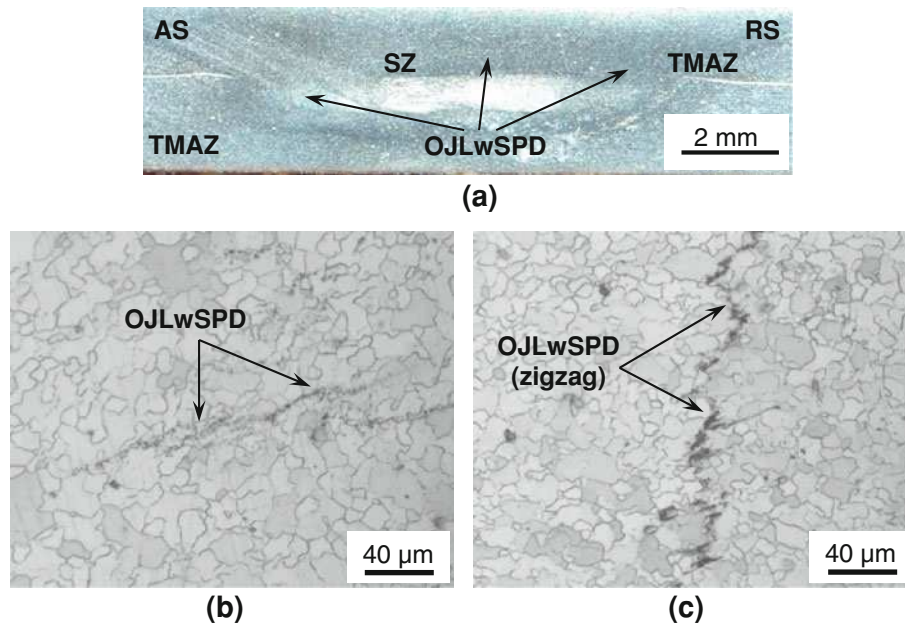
(a) Low-magnification OJLwSPD defects present in between the top and bottom sheets of a weld joined at a welding speed of 20 mm/s and rotational rate of 1000 rpm using a pin of 2.75 mm in length; high-magnification observations of the OJLwSPD defects that occurred at a rotational rate of (b) 1000 rpm and (c) 1500 rpm.
